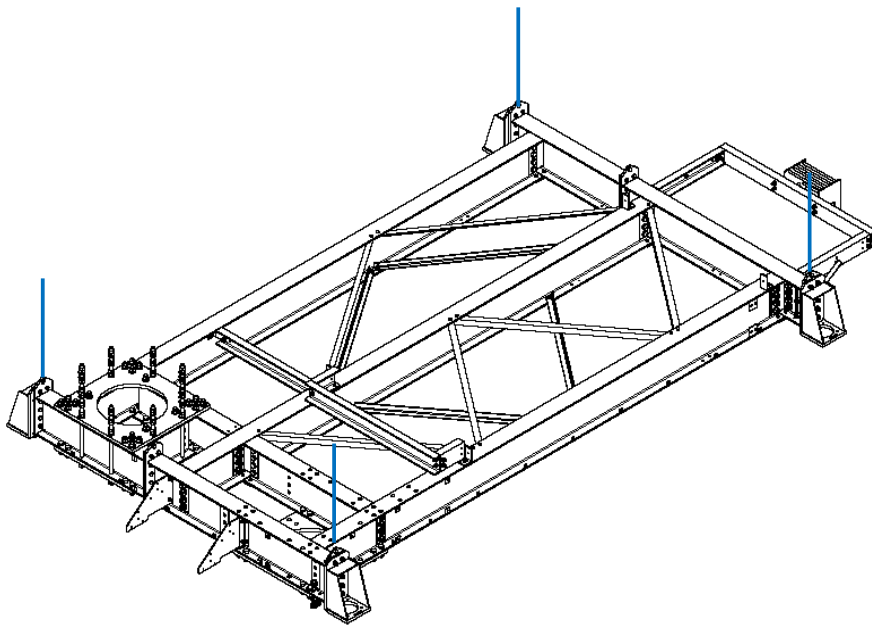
Fully assembled Space Saver frame with slings (in blue colour) attached to lifting lugs for lifting.
